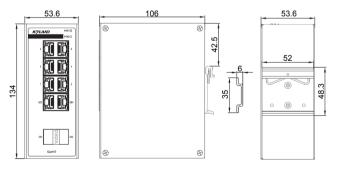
Opal10 Dimensions for DIN-Rail Mounting (unit: mm)
